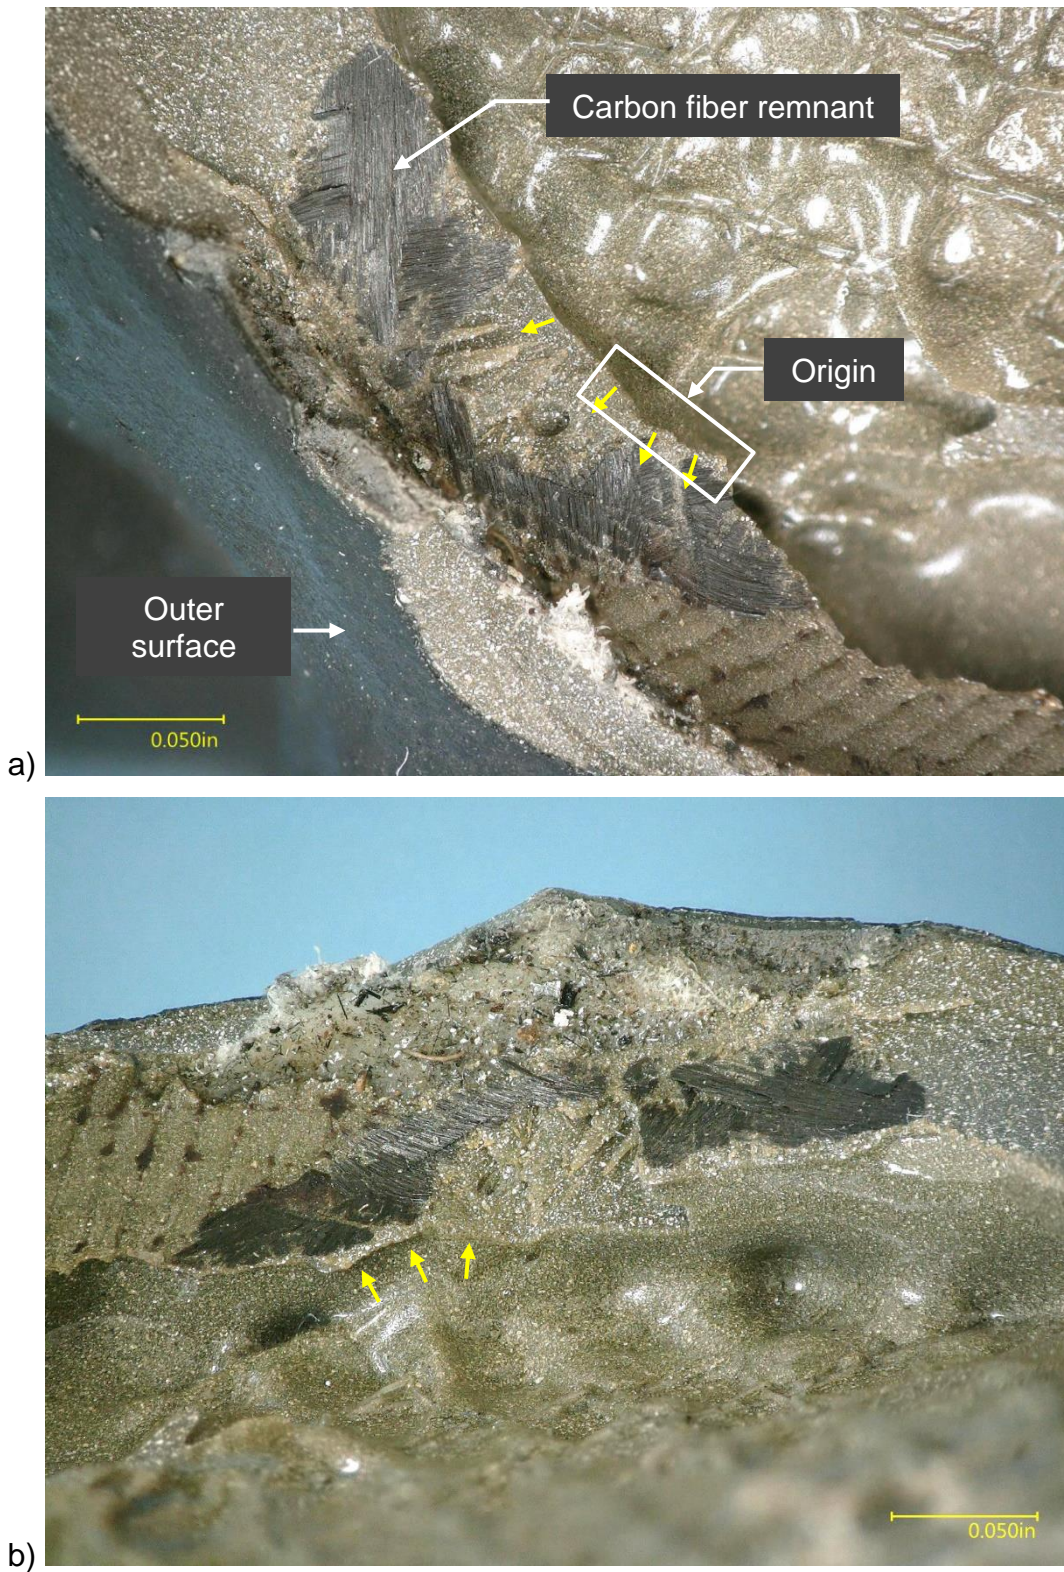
Images of the inboard closeout fracture origin area: a) plan view and b) oblique view.
